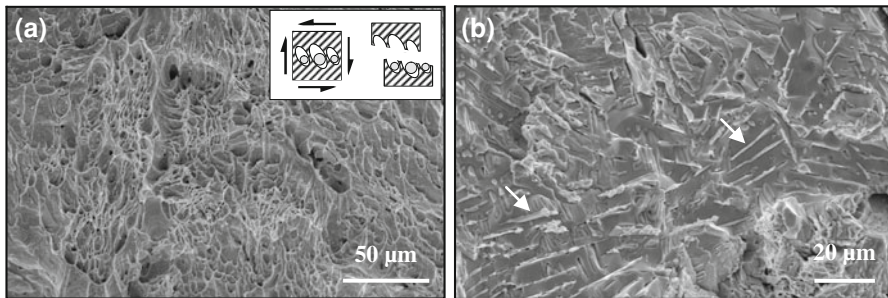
SE detector images of the fracture surfaces of impact test specimens made of the SAC 405 solder. a Specimen tested at room temperature. The fracture surface is characterised by the presence of many ‘dimples’. The idealised drawing in the inset shows two stages in the dimple-formation process; the dimples form around the hard, brittle IMCs in the soft, ductile Sn matrix and are slightly elongated since the material is sheared during the CVN impact test. b Specimen tested at -75°C . The flat grey areas are Sn, while the bright particles indicated by *arrows* are IMCs. Data from imec
